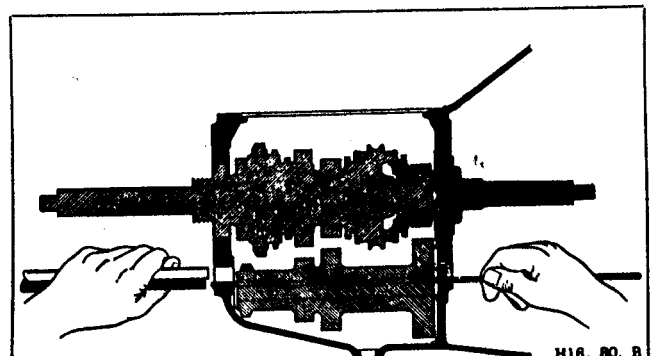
As an alternative to allowing the laygears to fall to the bottom of the box, a thin pilot rod may be passed through the gears as the shaft is withdrawn.
